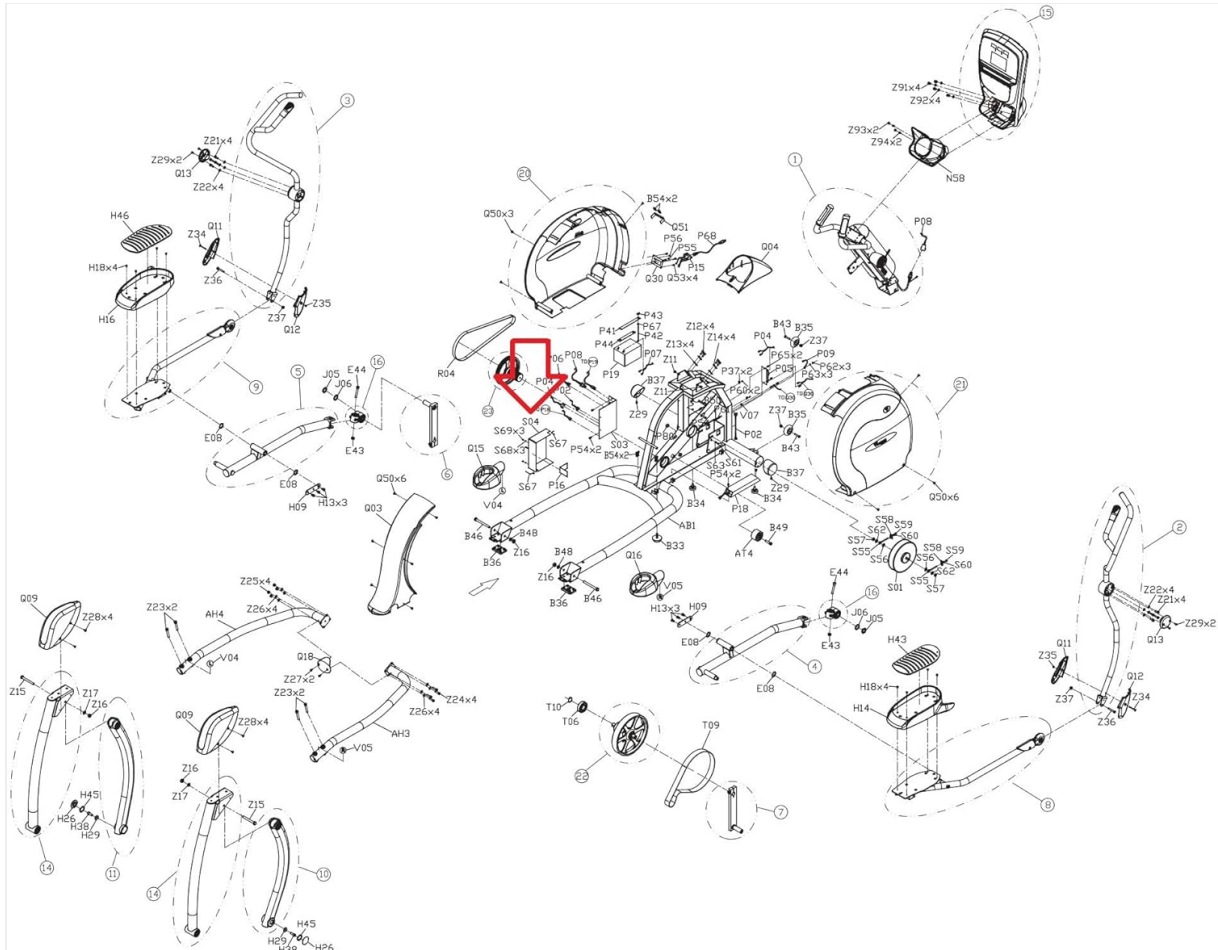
Exploded diagram illustrating various components of a Vision Fitness Elliptical. The LCB Cover (part 0000092839) is indicated by the red rectangle, showing its general location within the machine's assembly.
